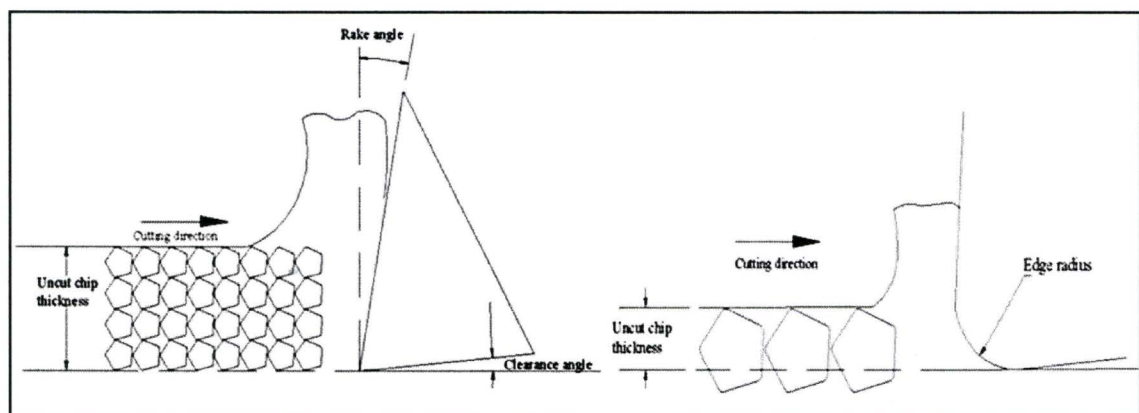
Material removal in (a) macro scale machining and (b) nano scale machining
